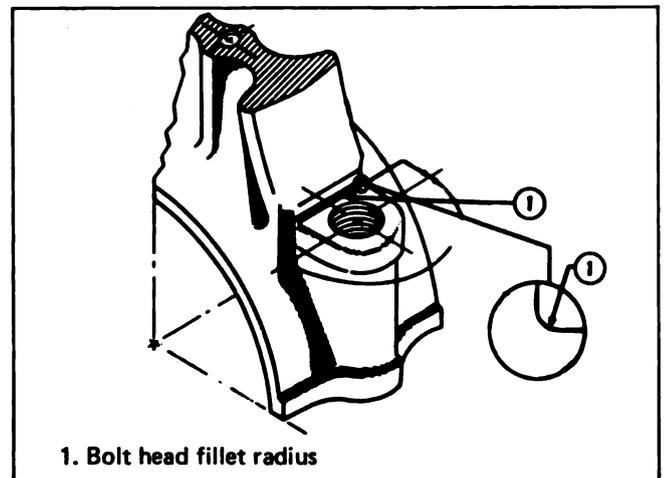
(N40114A). The Fillet Radius On The Bolt Pad.
